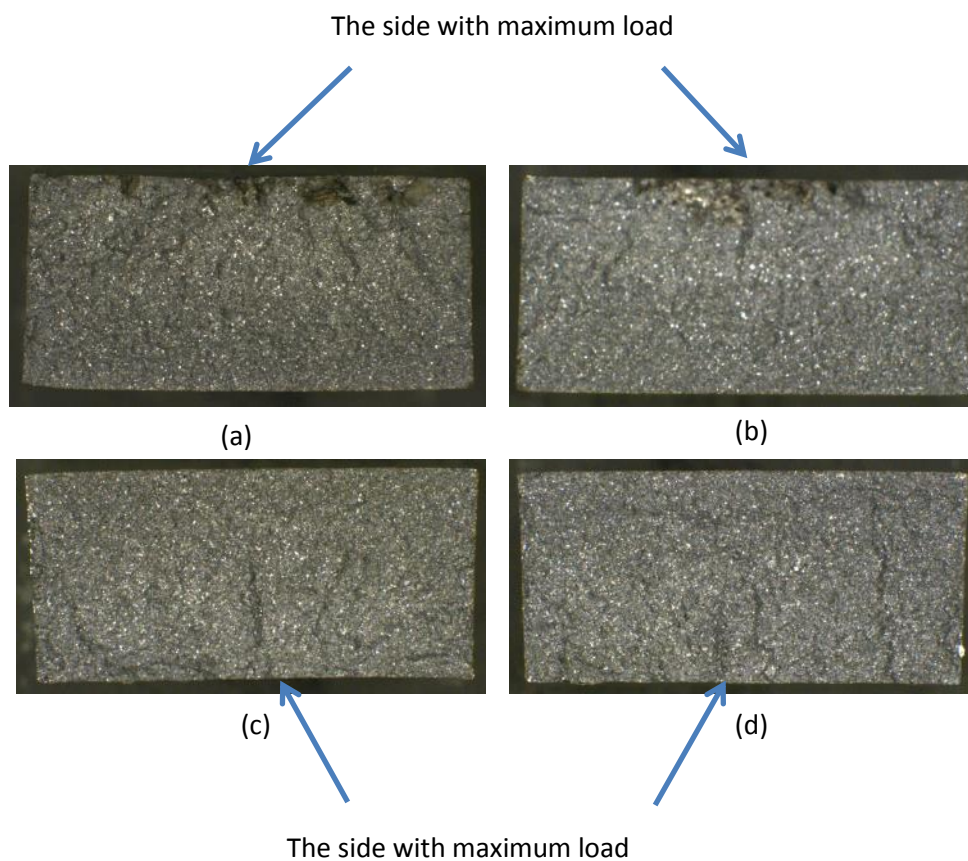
(a) and (b) Fracture surface of 2L99 alloy with upper part under the maximum load; (c) and (d) fracture surface of 2L99 alloy with bottom part under the maximum load.
